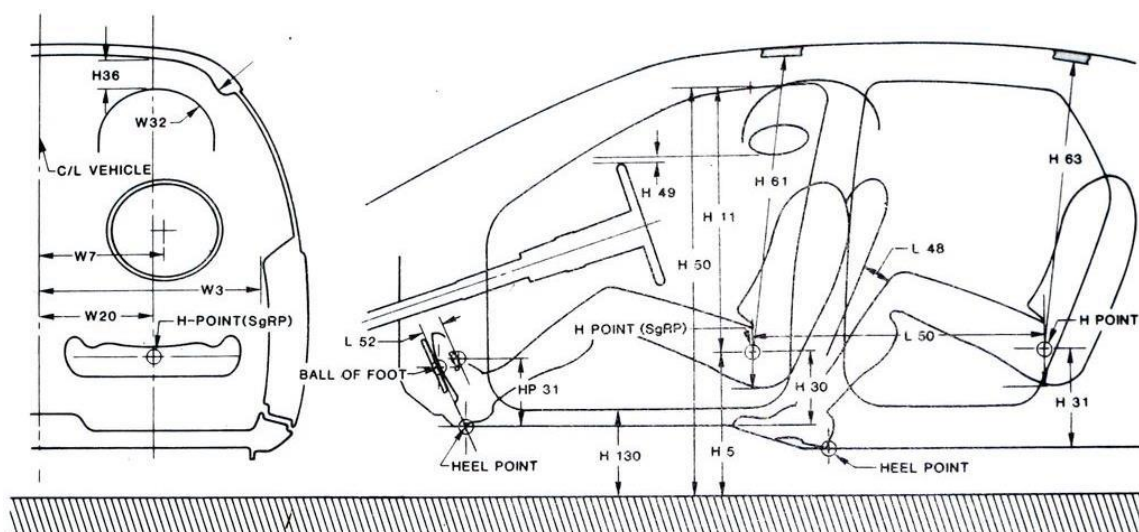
3 Main interior dimensions for passenger packaging (SAE J1100)
